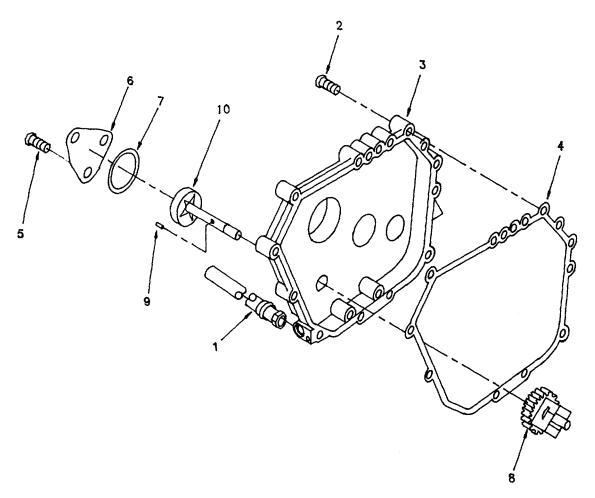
Rotary Pump and Diesel Engine Governor.
